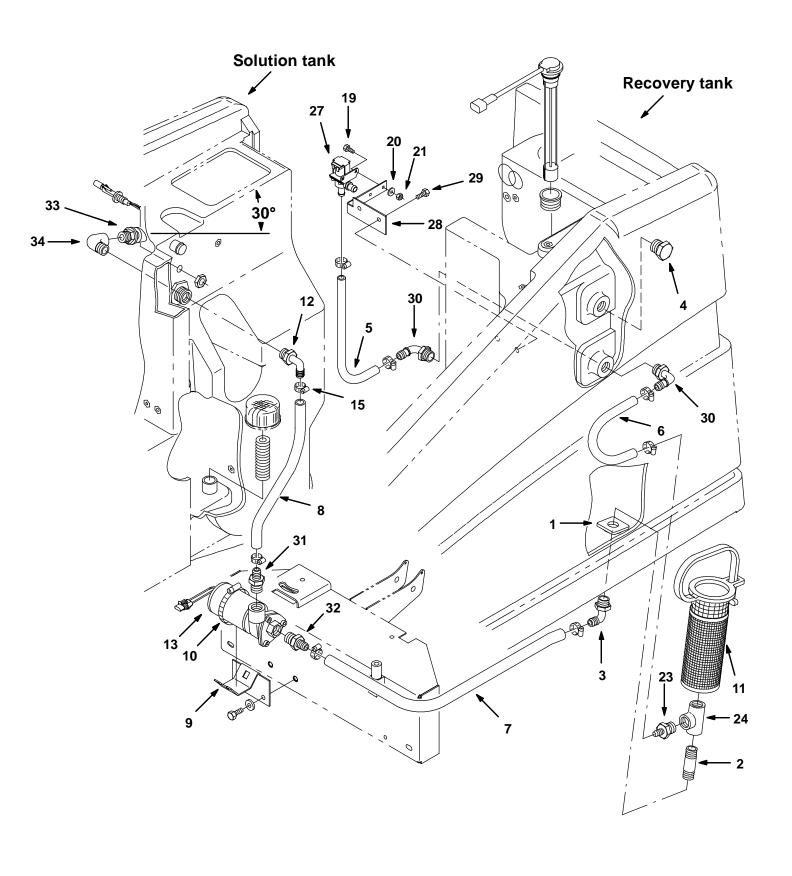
ES Pump/Airflow Valve Assembly (new location)
